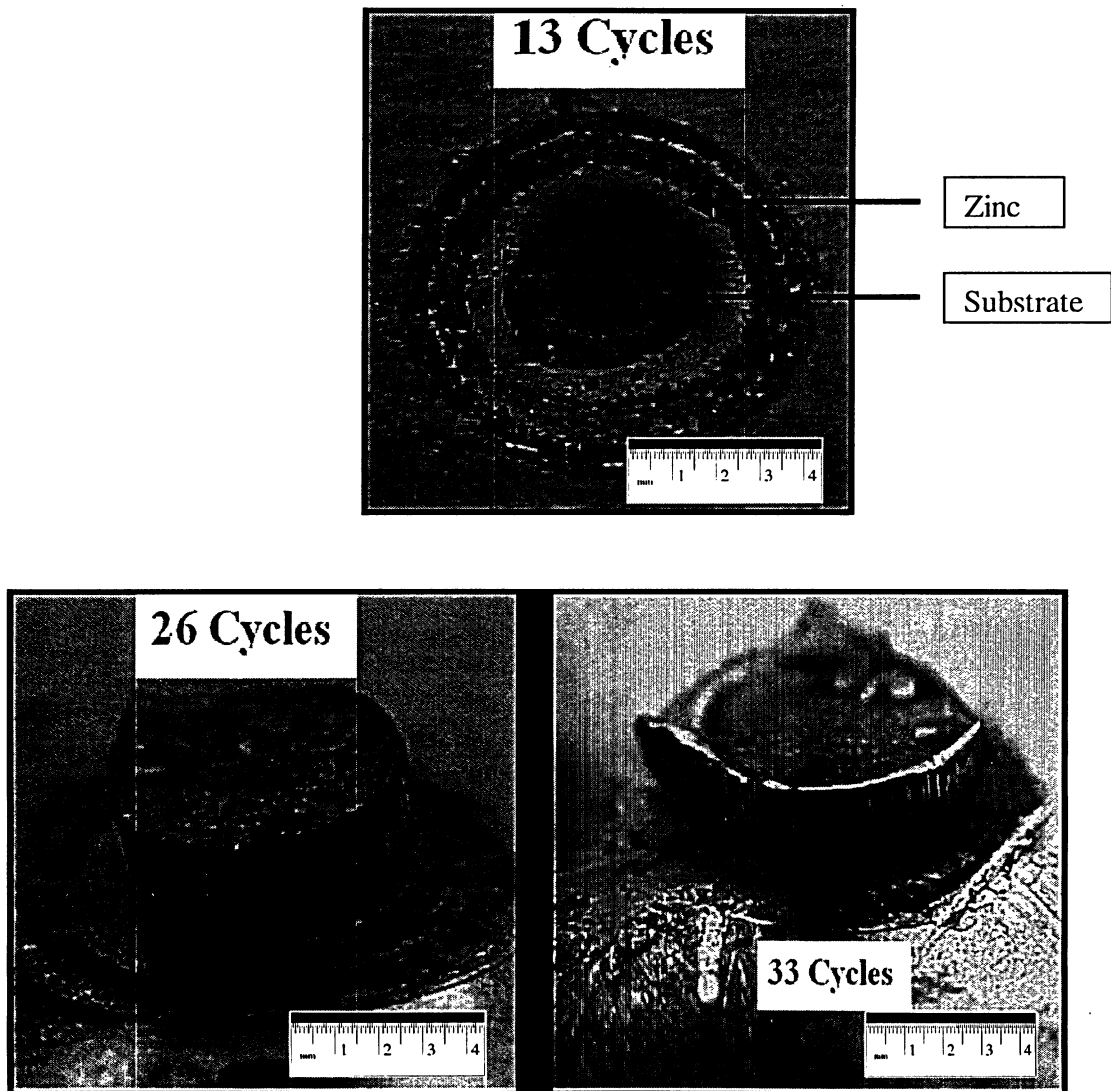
Macrograph at 13, 26 and 33 cycles during double pulse welding of DP600
